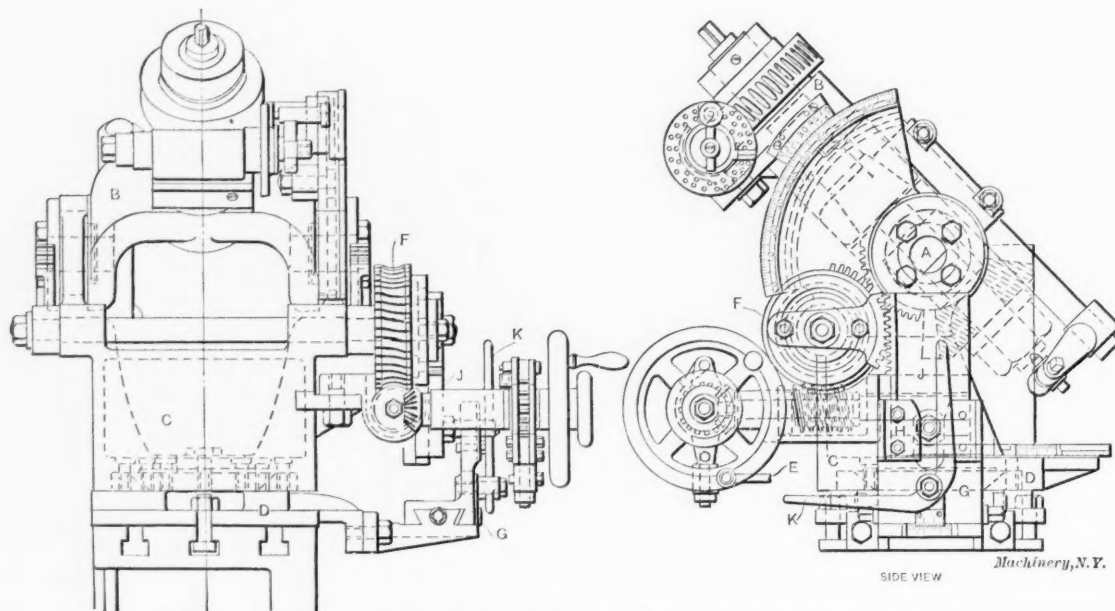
Rear and Side Elevations of the Bevel Gear Shaper Attachment shown in Fig. 148.
